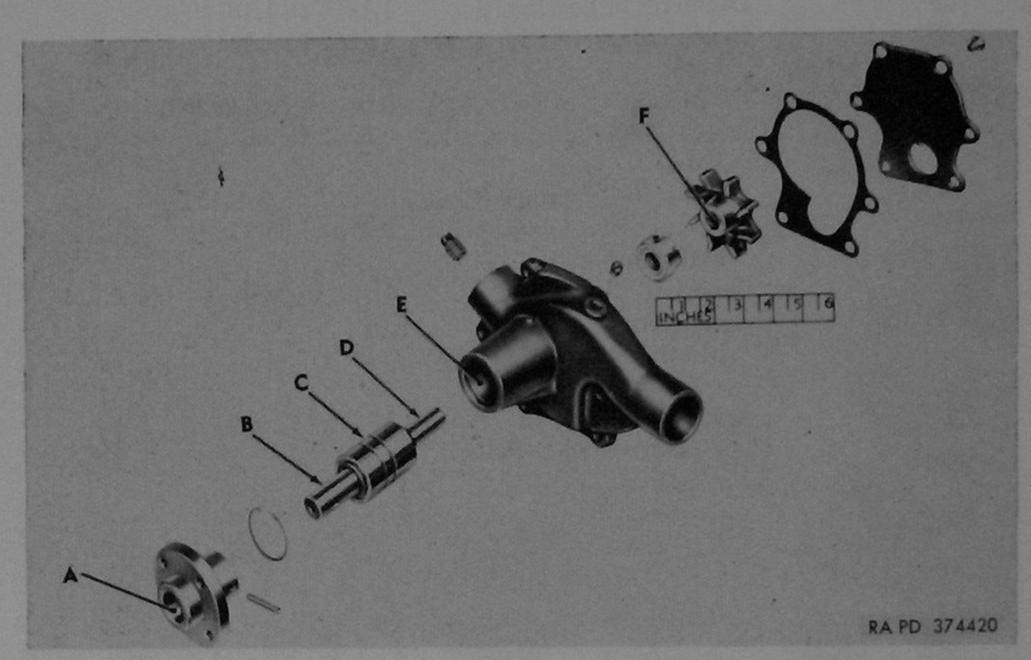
Repair and rebuild standard points of measurement for water pump (engine assembly 8726920).
